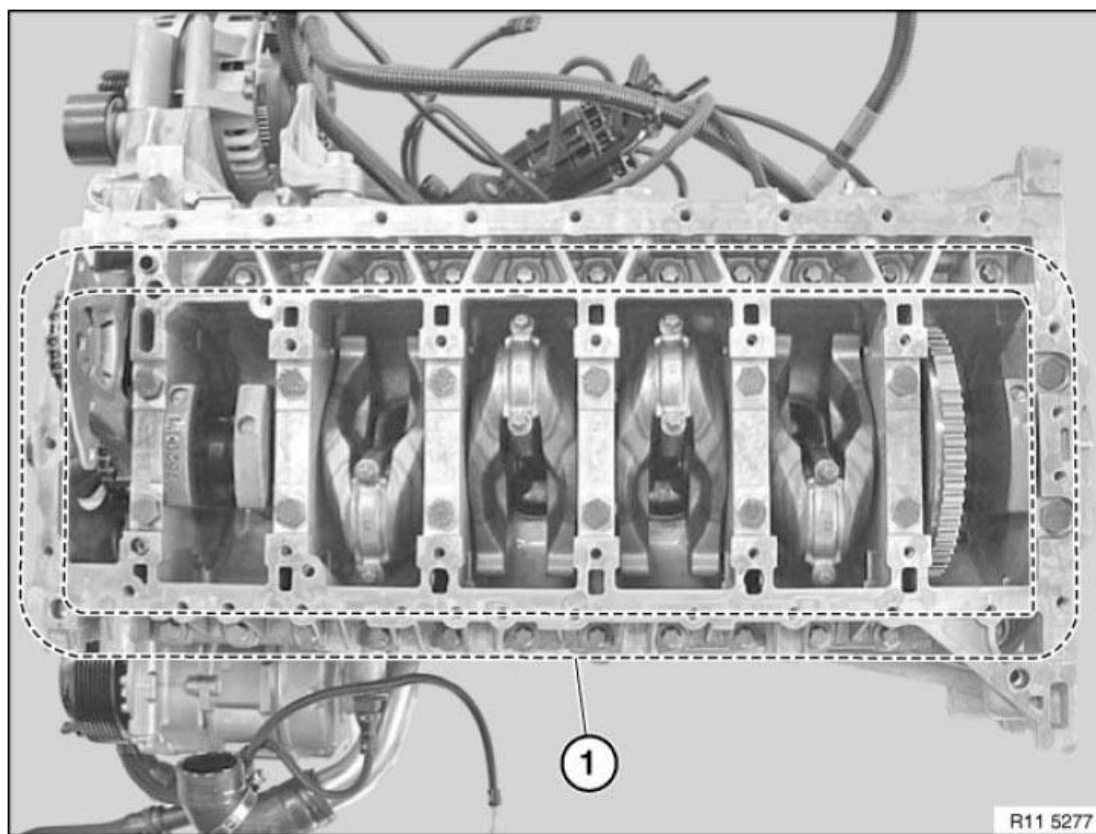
Identifying M10 Crankcase Bolt Colored Marking
